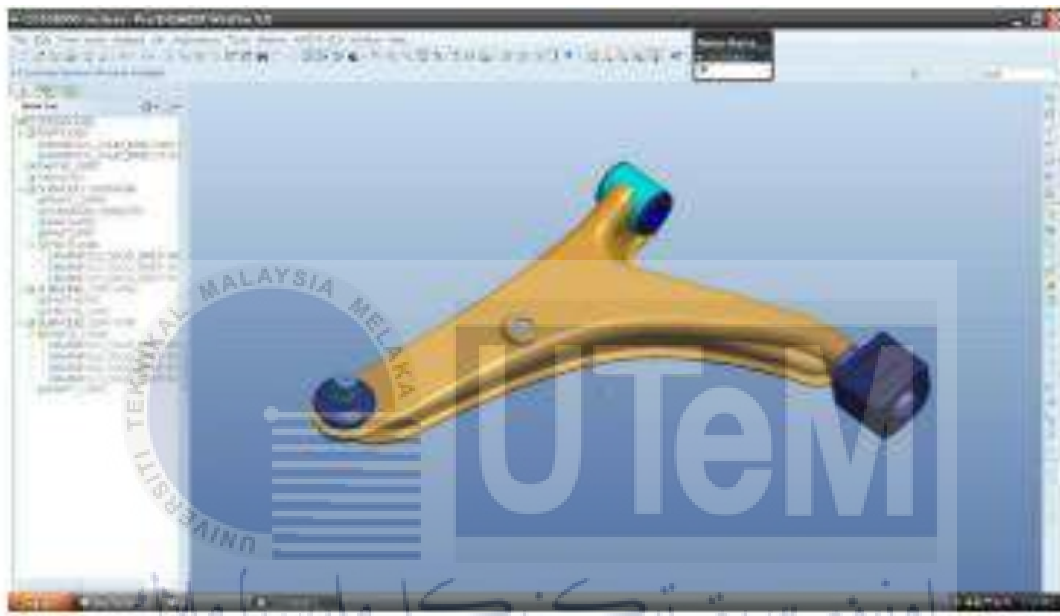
The assembly view of lower control arm (Pachapuri et al., 2021)
